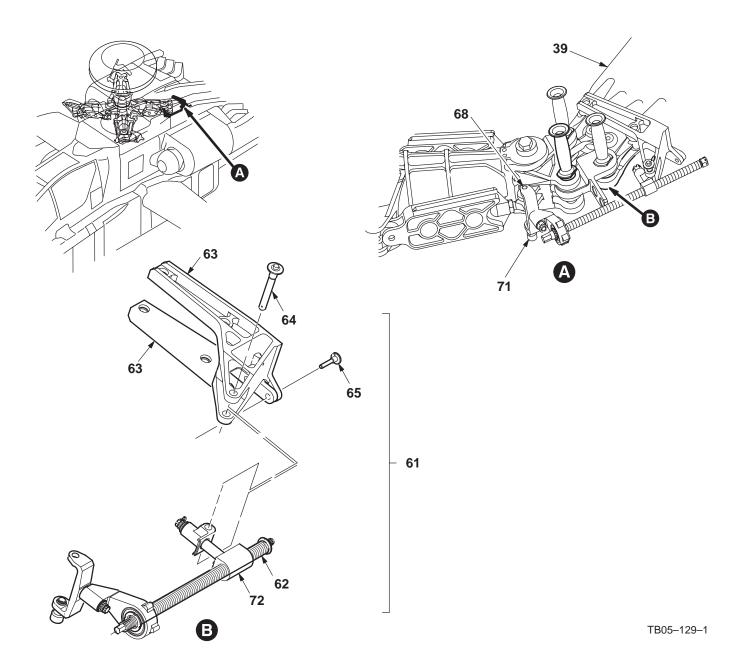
Blade Positioning Assembly on L/H AFT Main Rotor Blade
